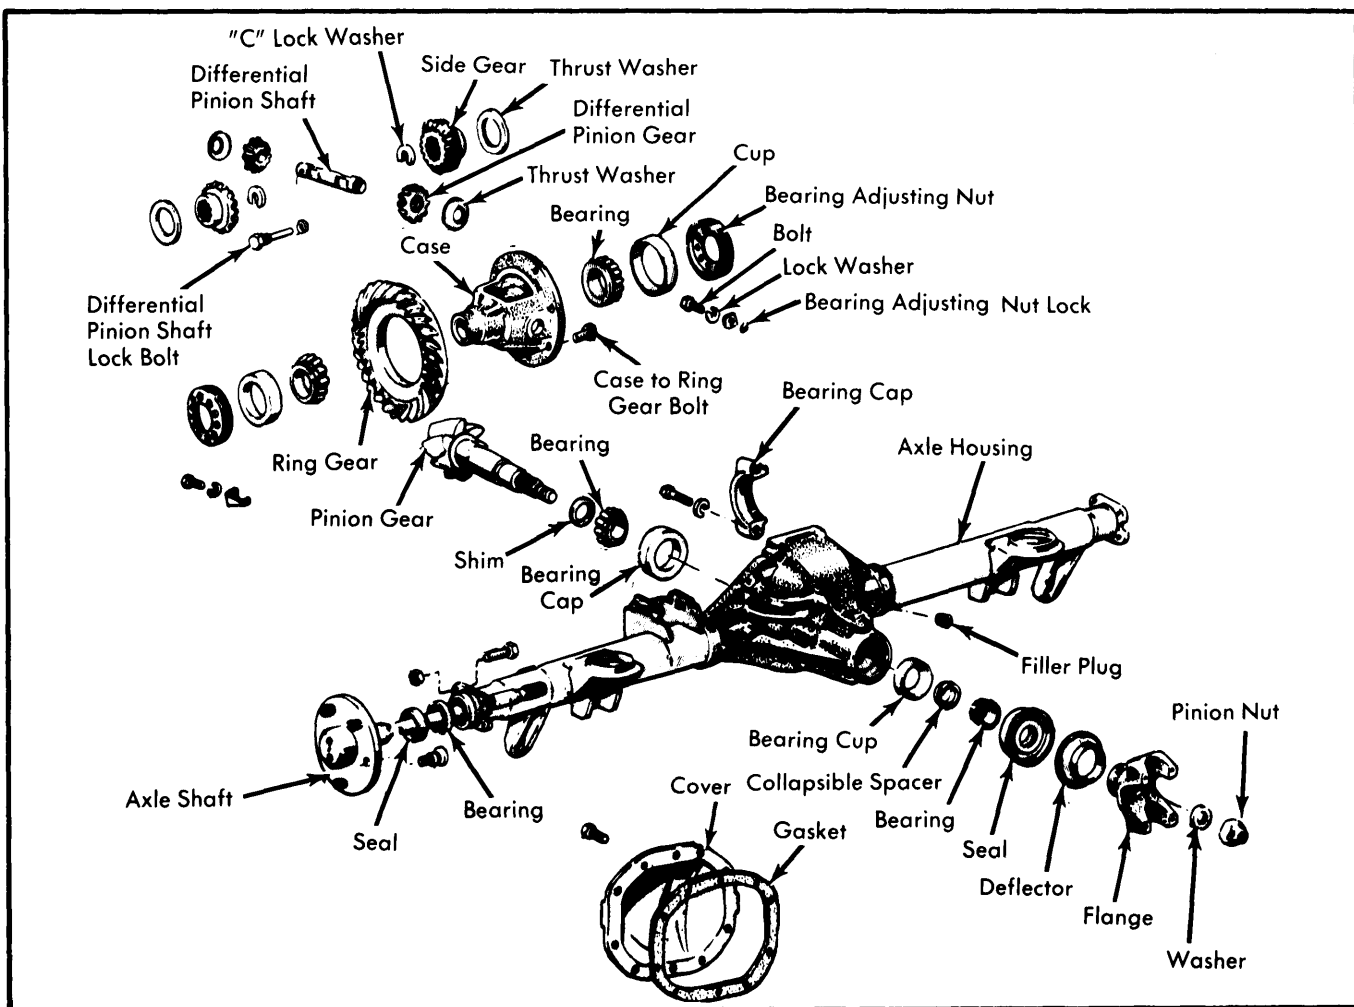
Ford Motor Co. Integral Housing Assembly (WER Type-Coil Spring Suspension)
